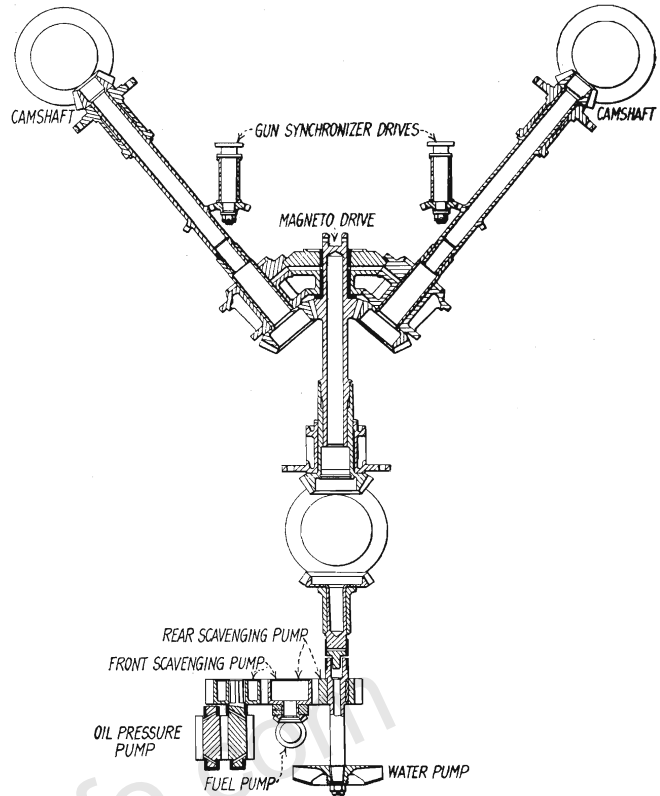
DIAGRAM OF TIMING-GEAR AND ACCESSORY-DRIVE LAYOUT Note Simplicity, Integral Construction of Shaft and Gear, and Pressure-Lubricated Chilled-Aluminum Plain Bearings
